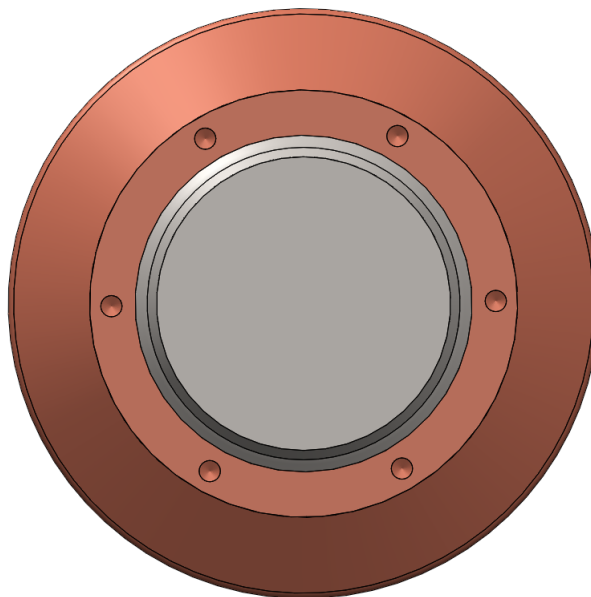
Copper nozzle cooling channels top view annular ring
